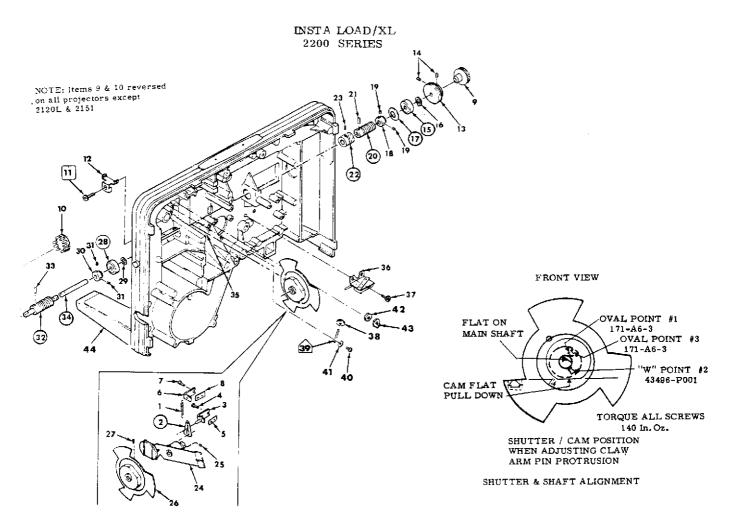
REMOVAL AND REASSEMBLY OF MAIN SHAFT
